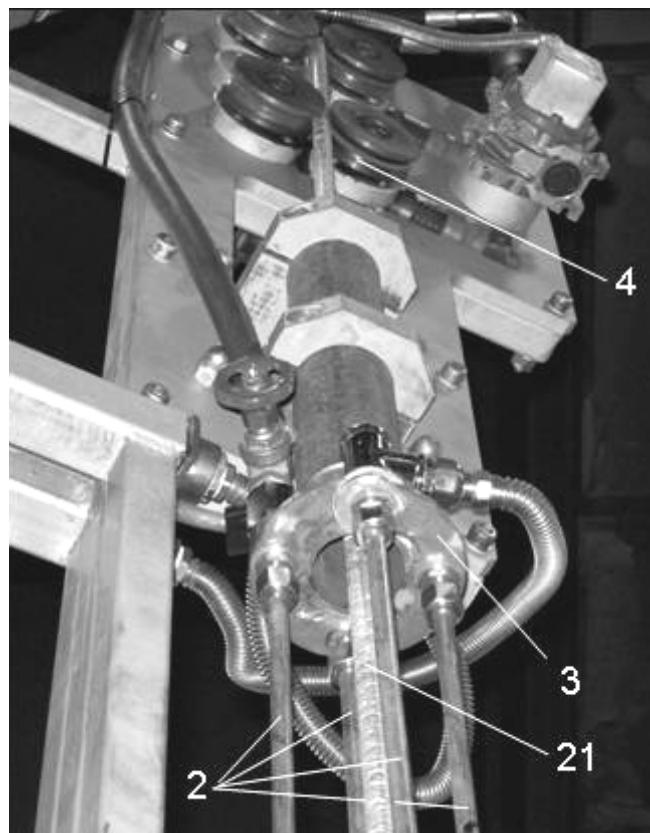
Collector of mould with drawing mechanism: 2-supply pipes; 3-collector; 4-drawing mechanism; 21-cast aluminium wire.
